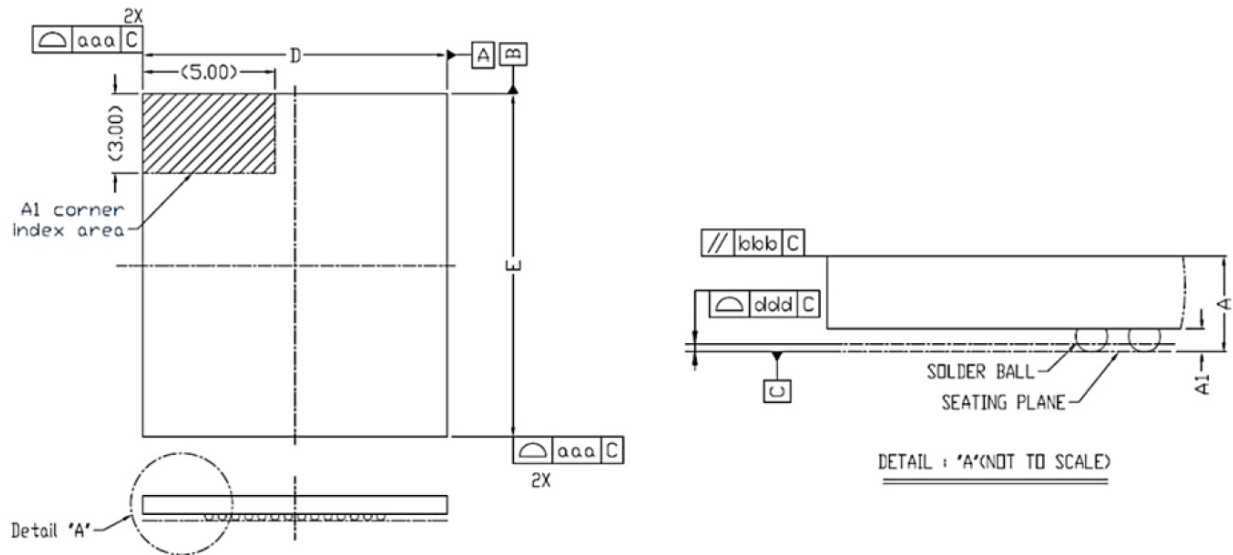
153-Ball Package Dimensions – Bottom View
